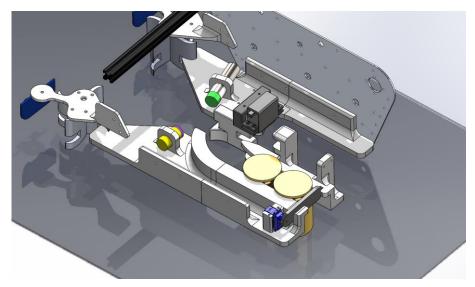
The weights are held upright and contained in the robot in the holding bay.
